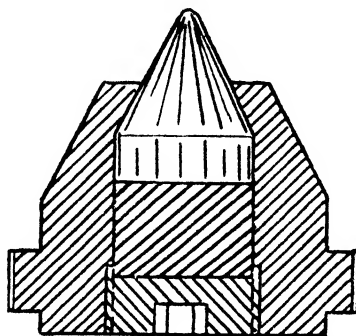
Conically shaped diamond for truing thread-grinding wheels, cold set in a special holder
